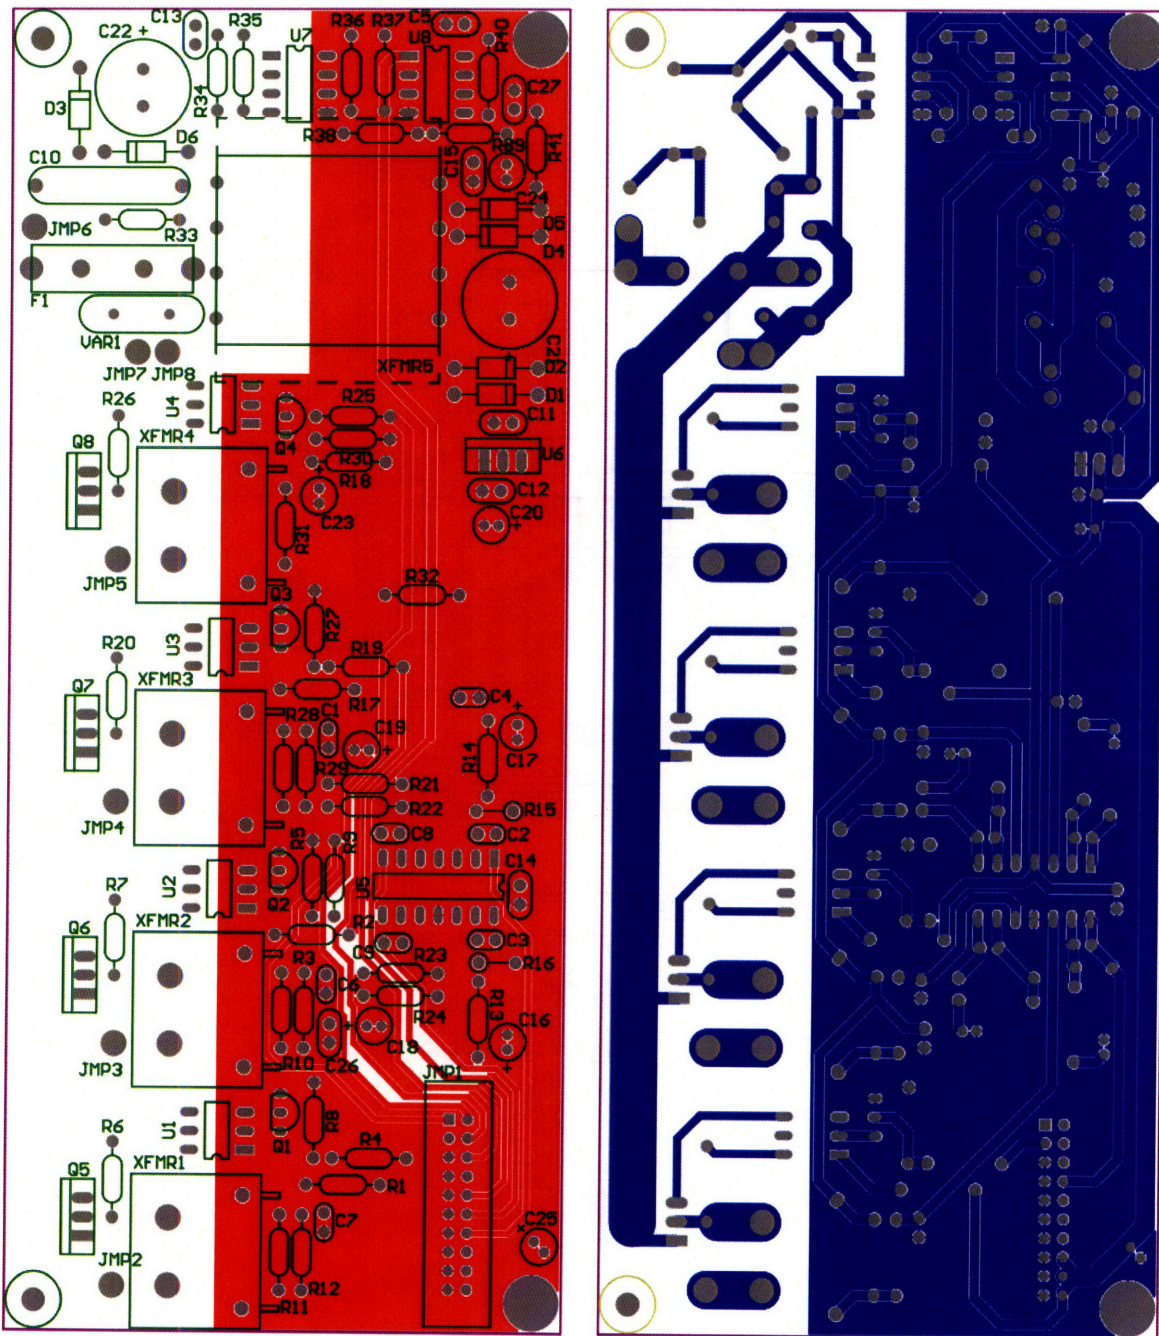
The top layer (left) and bottom layer (right) views of the Plug's high-voltage circuit board.
